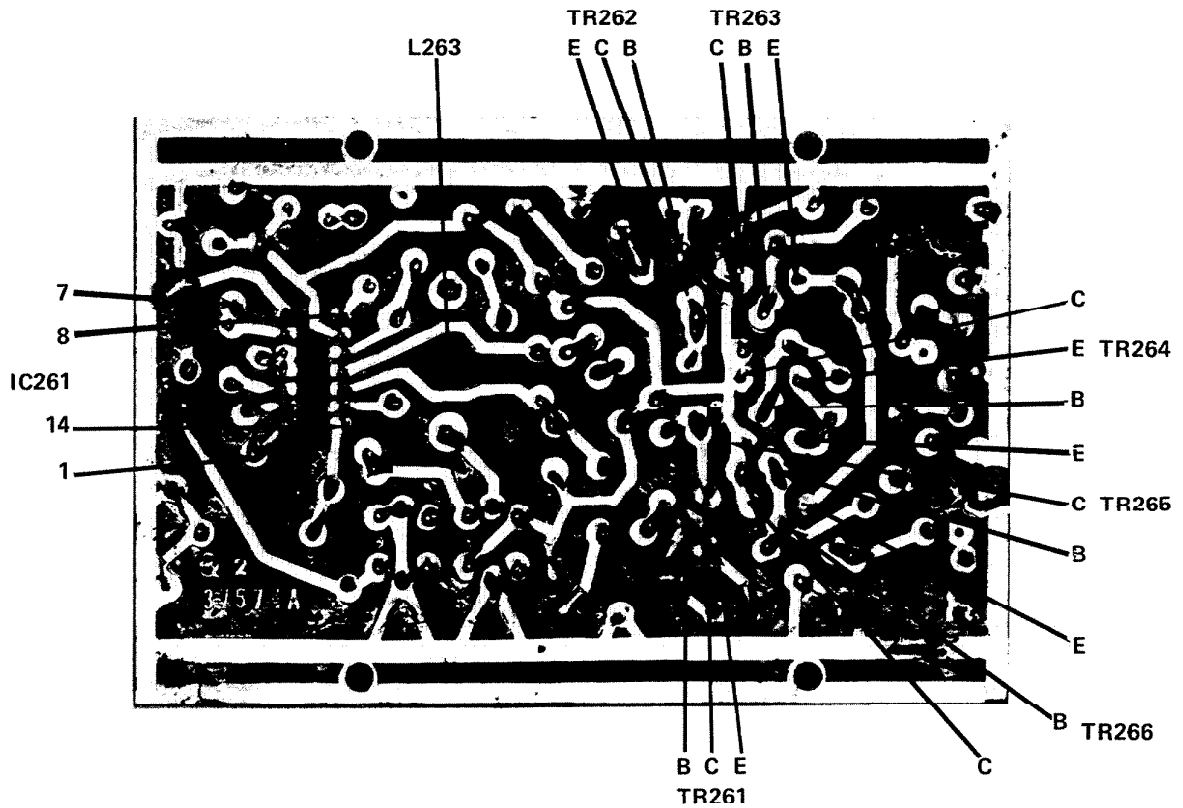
MULTIPLEX & SWITCHING PC ASSEMBLY
